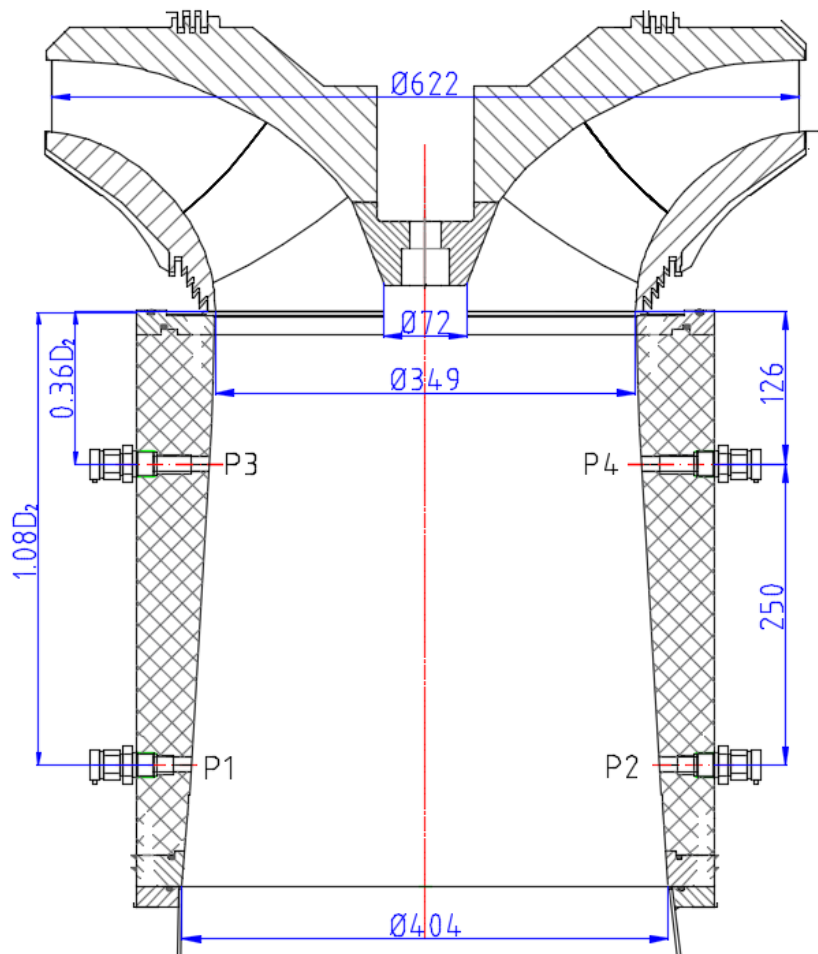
Pressure sensor locations at the Waterpower Laboratory. The dimension in the drawing is given in millimeters
